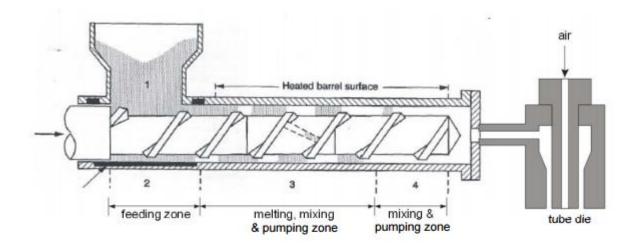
Extrusion Machines (Polymer Extrusion)
